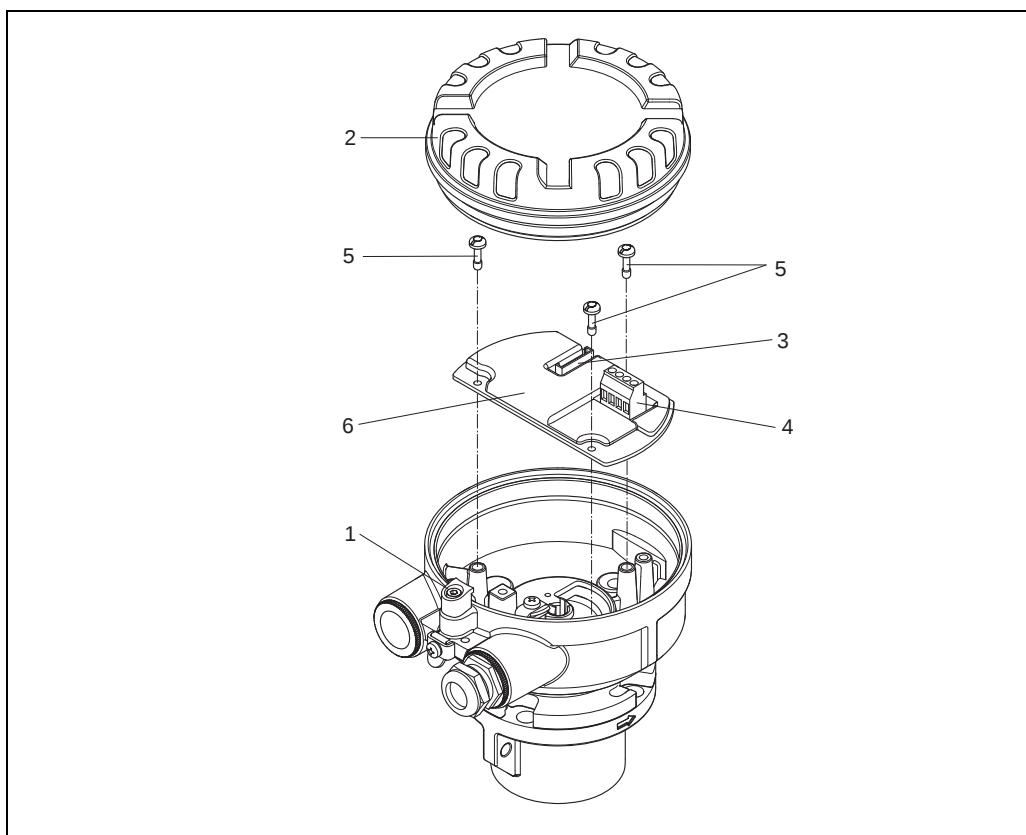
Electronics compartment of the sensor housing remote version: removing and installing printed circuit board
